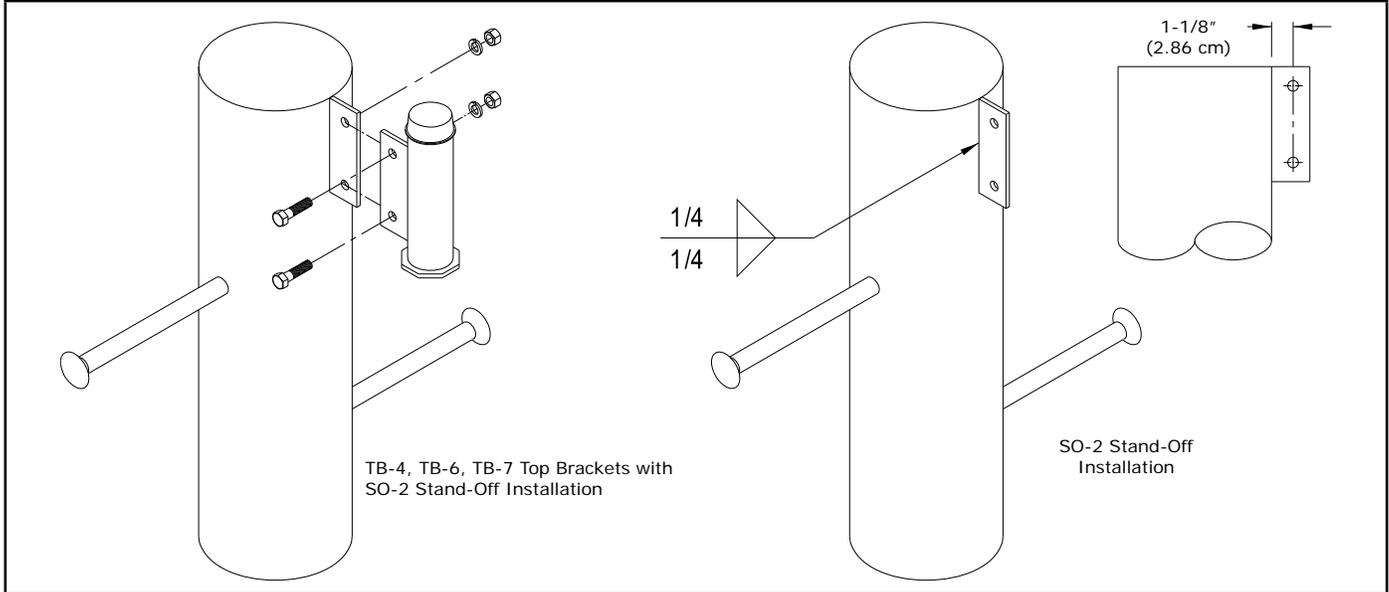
Installing Bolt-on Top Bracket & Weld-on Stand-off
